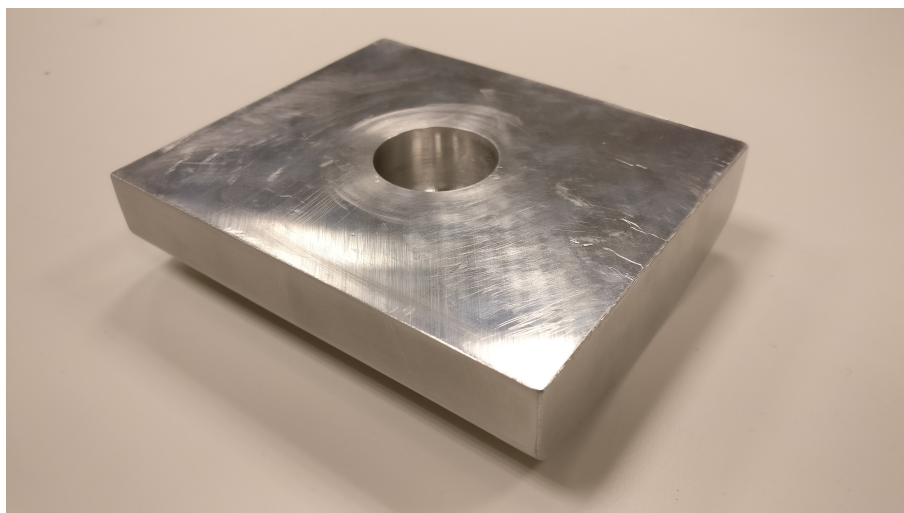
Tool for applying force onto ski, hole for connection to uniaxial compression test machine via slight press fit visible.
